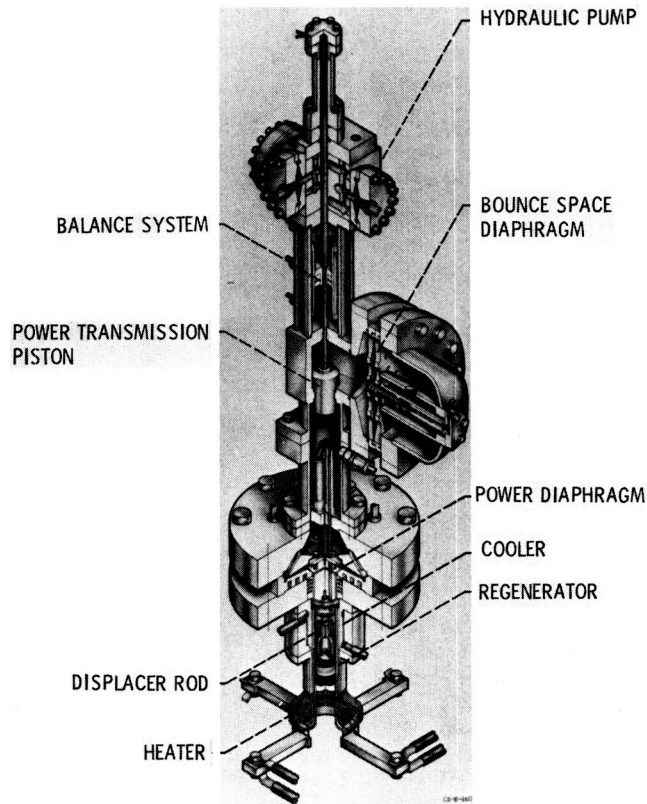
Cutaway view of the RE-1000 Free-Piston Stirling engine with hydraulic load.
